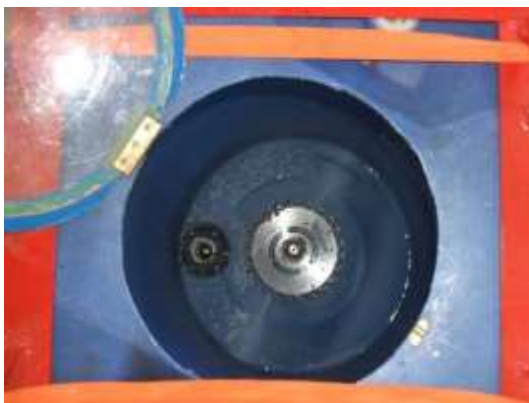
The machinist did a good job of machining a 20mm bore hole and cutting a pin slot using a file. The pulley was increased from 2-3 inch to get 750rpm blade spin speed.
